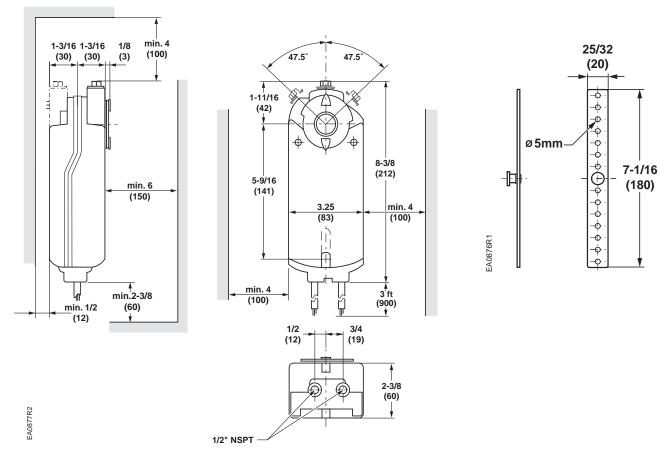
GMA Actuator and Mounting Bracket Dimensions.
